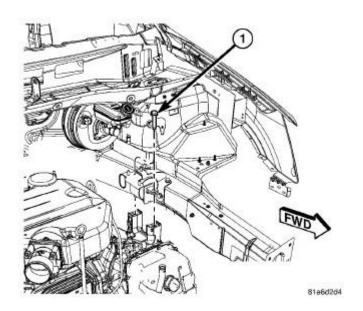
Engine Mount-To-Trans Bracket Bolts Courtesy of CHRYSLER LLC
